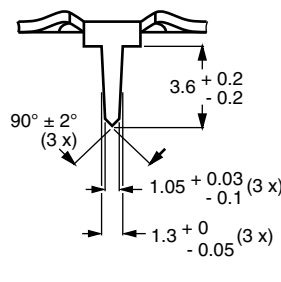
Mounting hole diagram and outline; form MR: With mounting ring and pins
